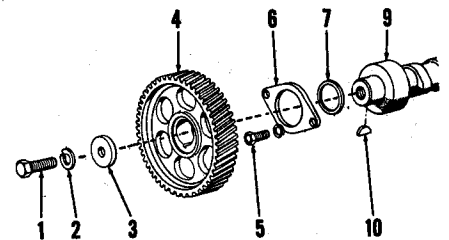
View showing assembly of camshaft gear to camshaft. Camshaft end play is controlled by plate (6) which fits between shoulders on gear and shaft.
